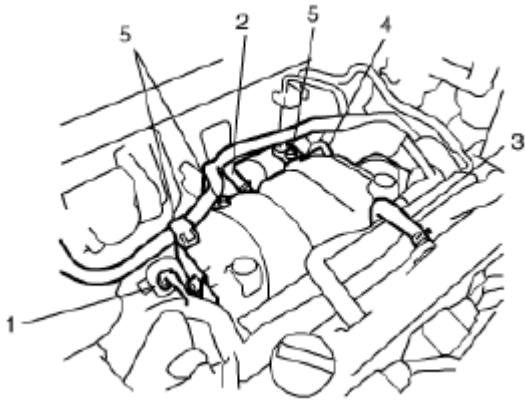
Identifying Vacuum Hose, Brake Booster Hose & PCV Hose
